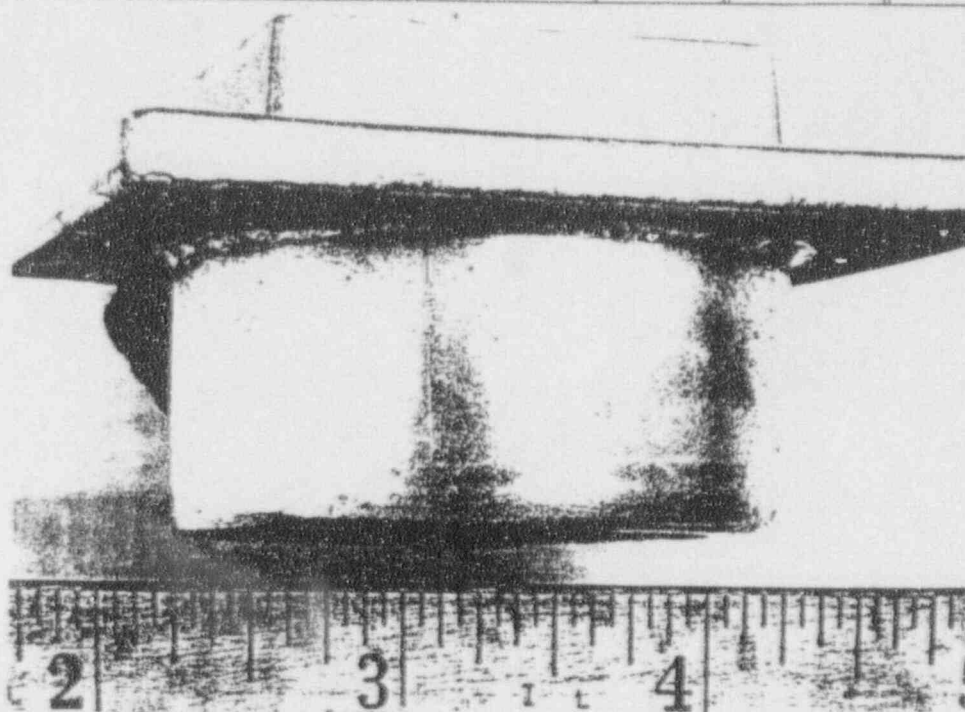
Vertical crack in outer shield of relay, as received. Portion of crack near solder joint is filled with solder. Ma-2513.
